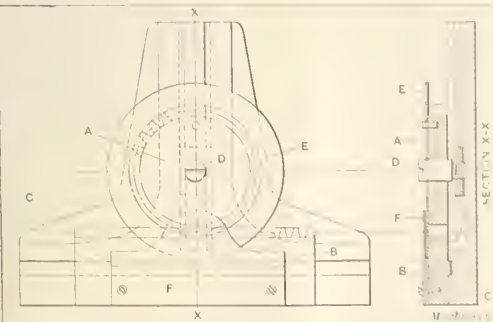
Device for Use in Mechanical Development of Pump Impeller Outlines
